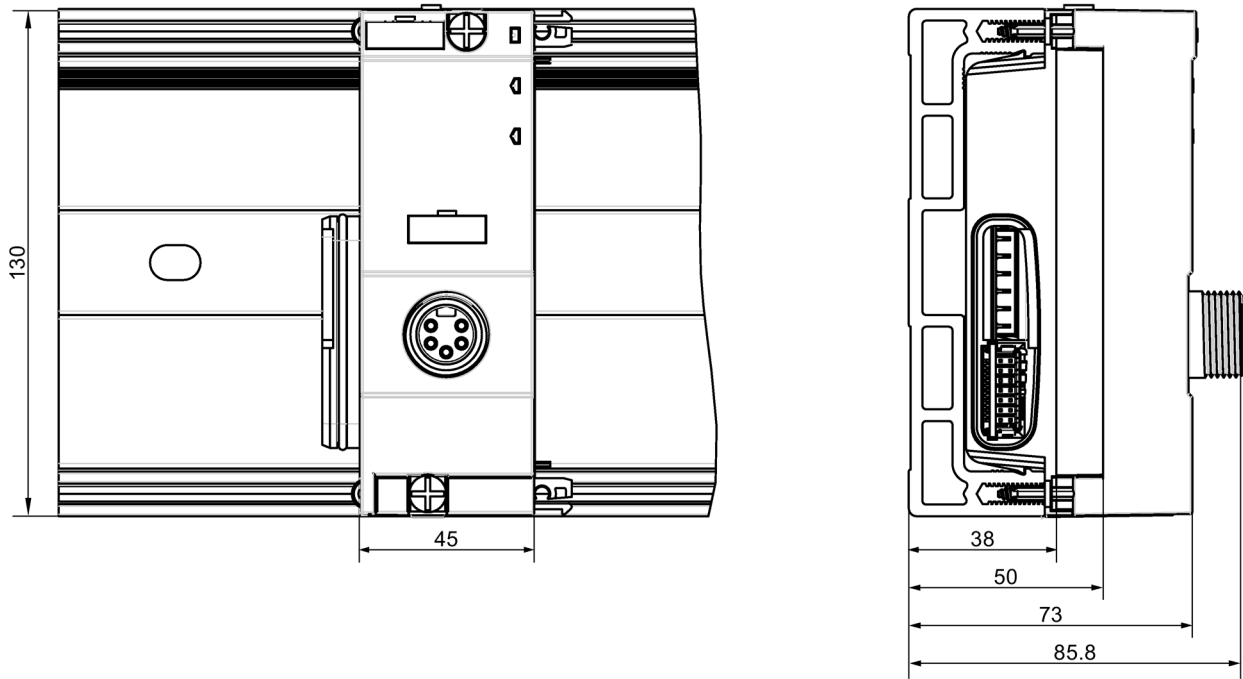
Dimensional drawing of the power module with CM PM 7/8" connection module
